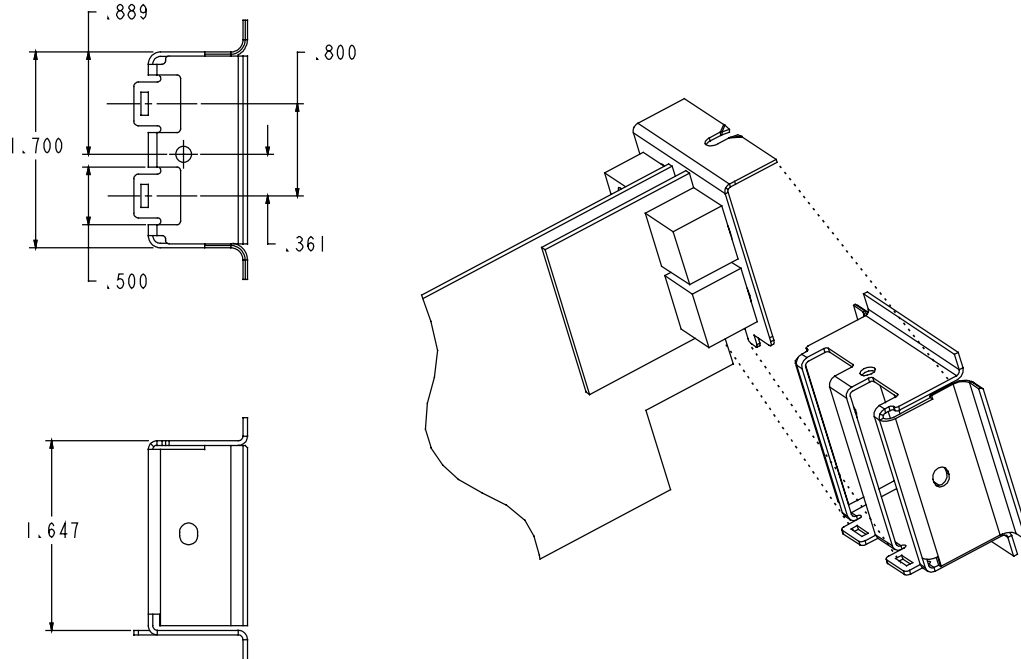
A.G.P. Card I/O Dimensions and Implementation Example
